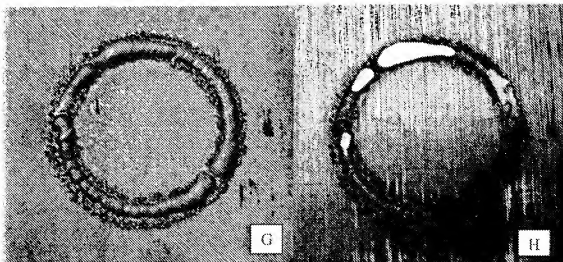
Deposits from laser, arc welding and plasma powder deposition
